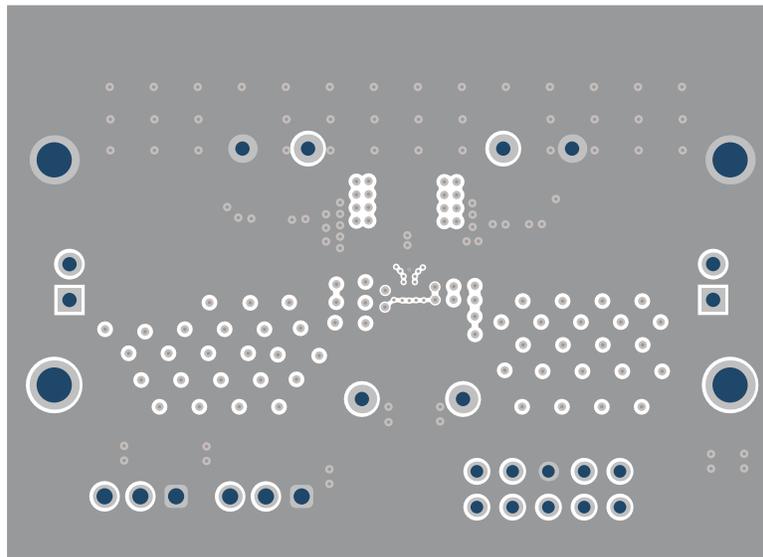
TPS63820EVM PCB - Signal Layer 1
